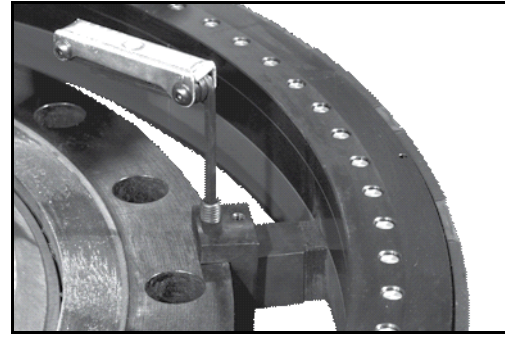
LOCATOR PAD EXTENSIONS
